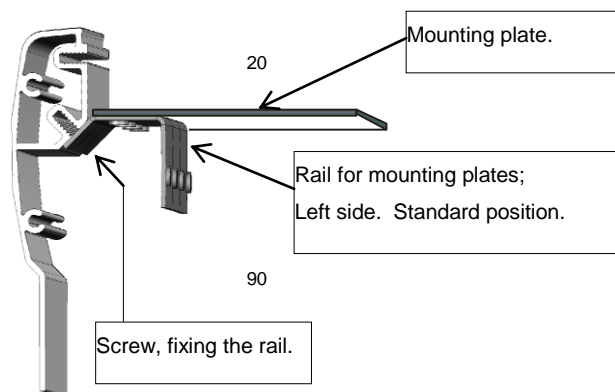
Detail of a rail mounted for standard position of the mounting plate.
